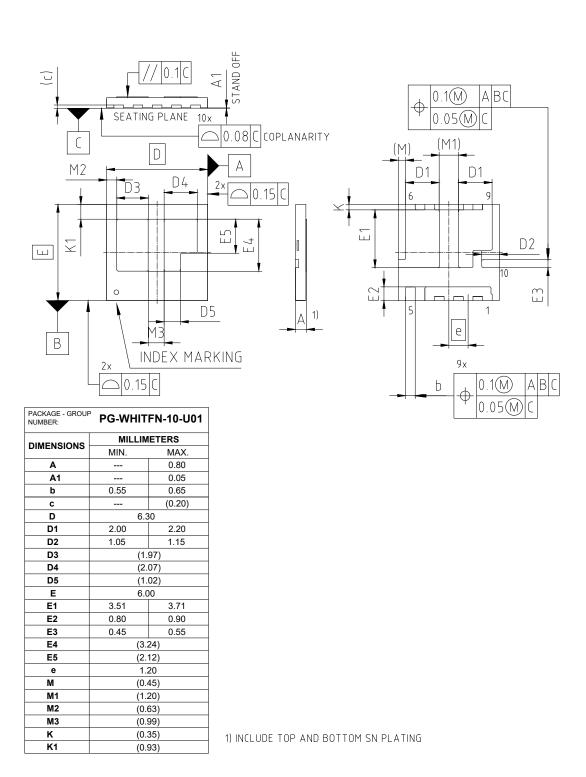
Outline PG -WHITFN-10-1, dimensions in mm
